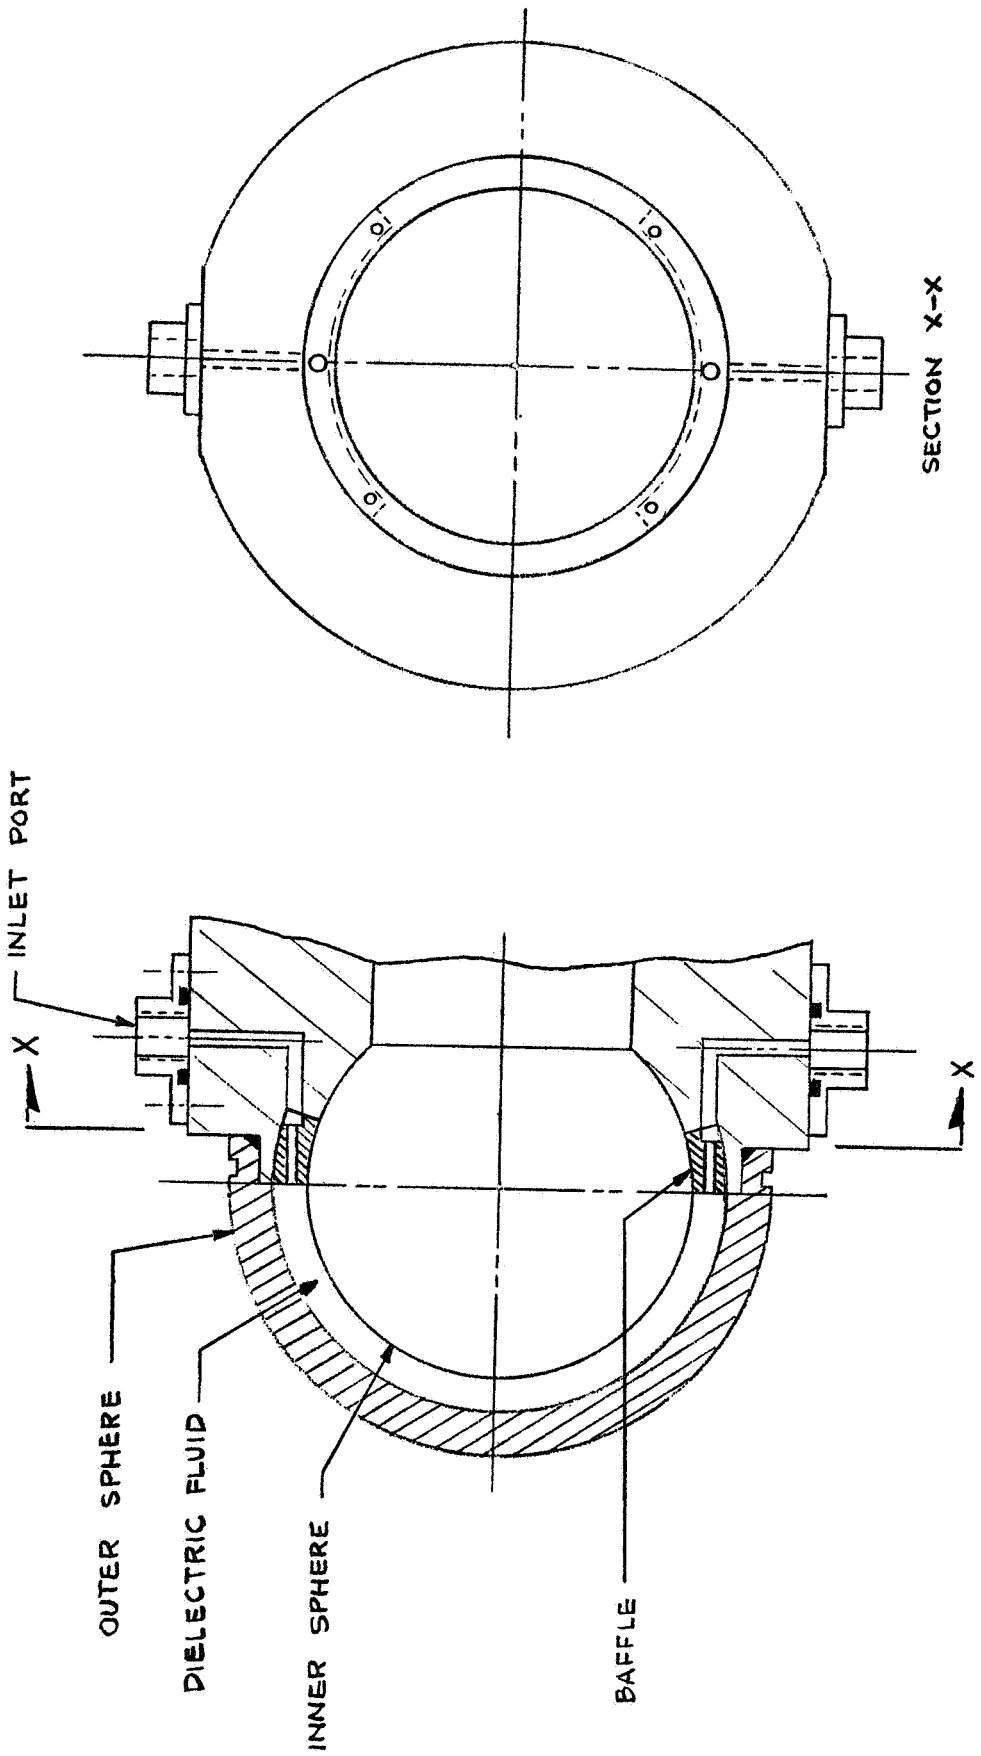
(b) ALTERNATE ENTRANCE/EXIT PORT ARRANGEMENT
